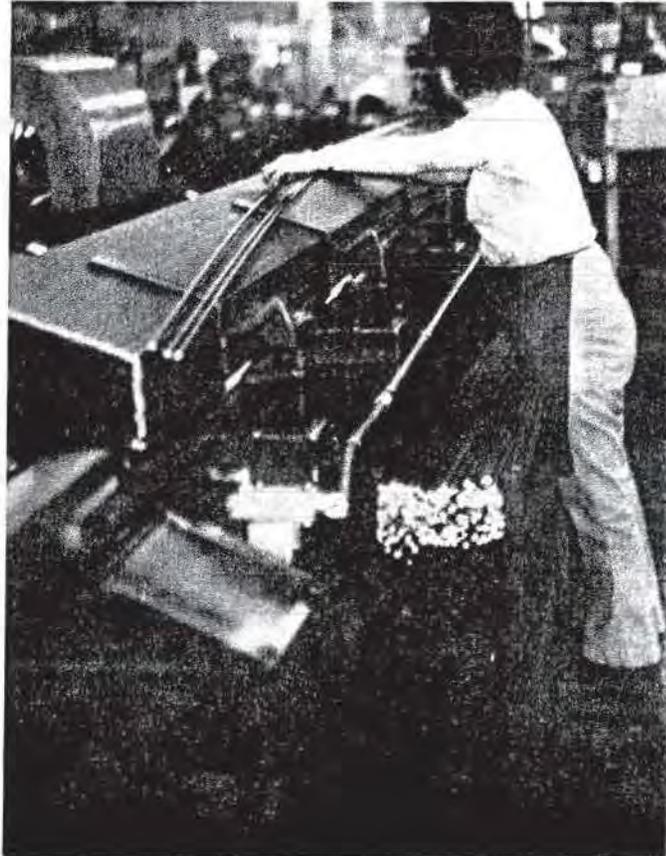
, Job 12: Extreme reach required to load bar stock onto rack over machine base and stock rack. Operator standing on edge of wooden platform could trip and fall.
